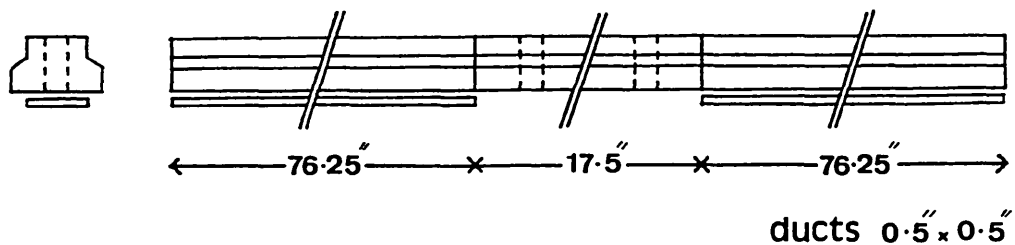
Arrangement of slot wedge and damper bar showing ventilation ducts.
